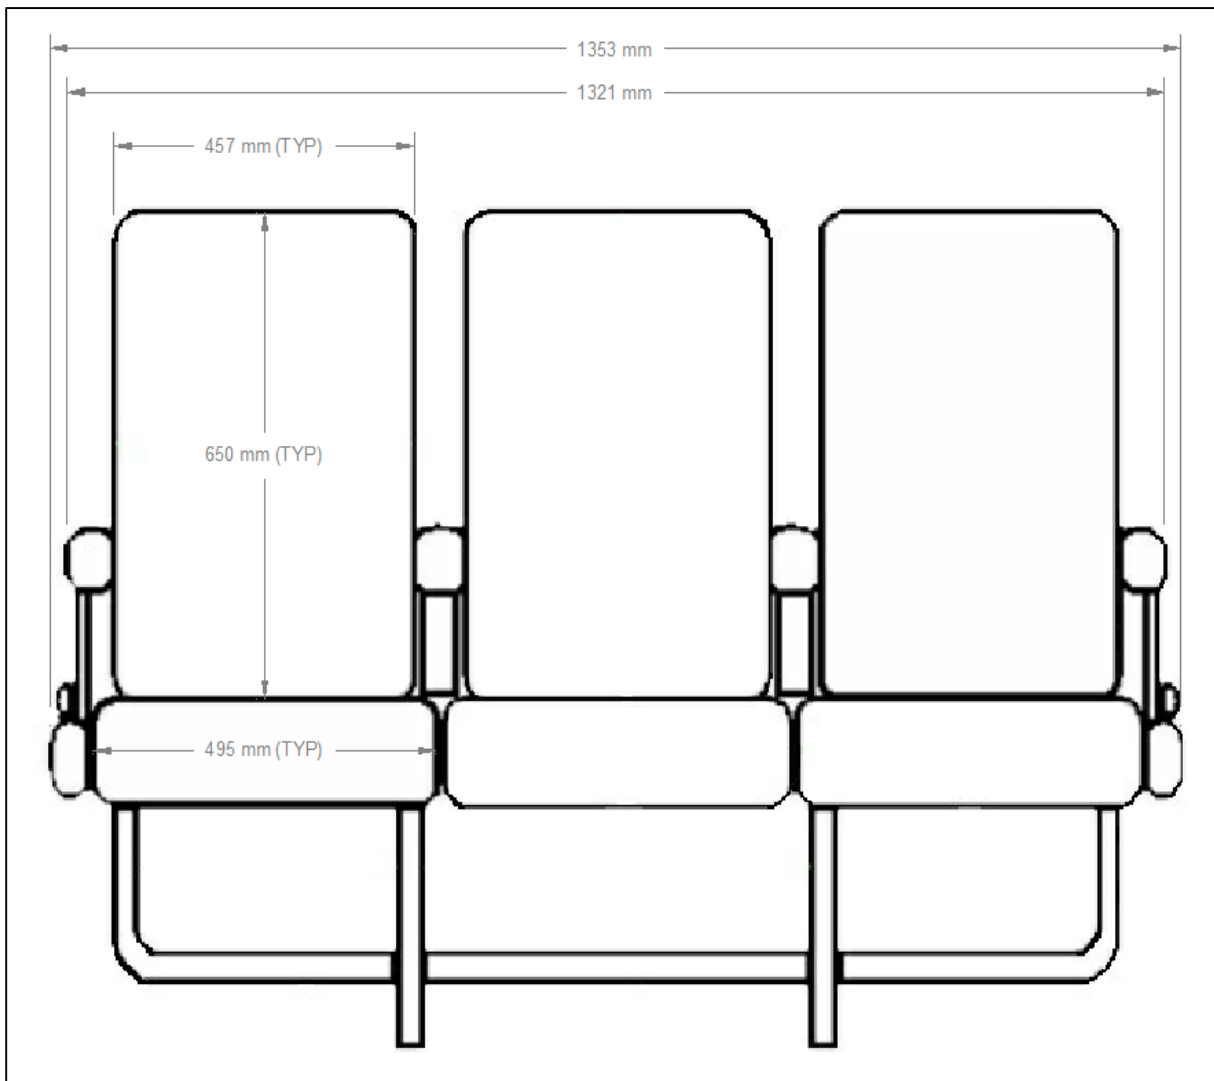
Boeing 767 Center Seat Dimensions (Trupka, 2011)
